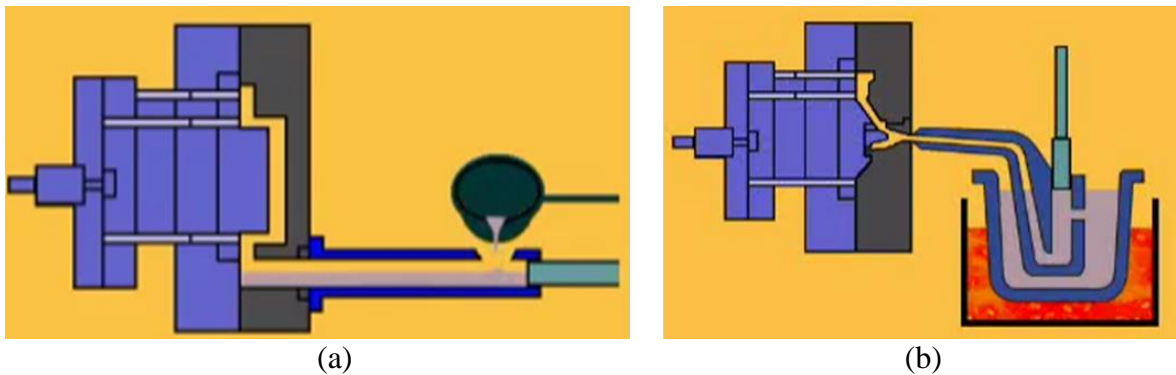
High Pressure Die Casting Schematics. In (a) cold-chamber die casting, the shot cylinder is placed outside the molten metal pot, whereas in (b) hot-chamber die casting, the shot cylinder is partially immersed in the molten metal during the filling process. Images reproduced with permission from [1].
